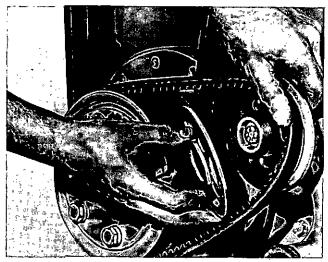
Installing water pump belt - V8-350/VT8-430
